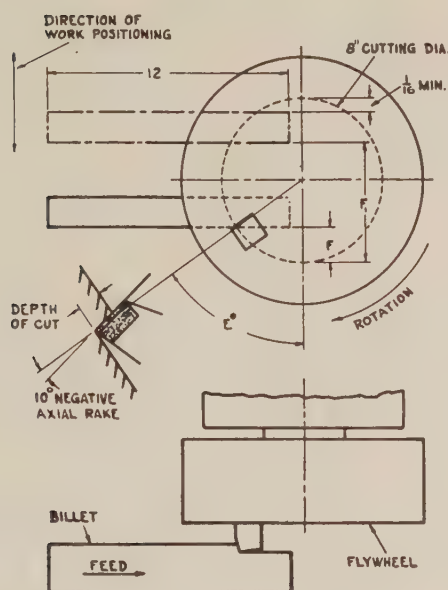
CUTTER SETUP AND TABLE SHOWING WORK POSITIONS USED
